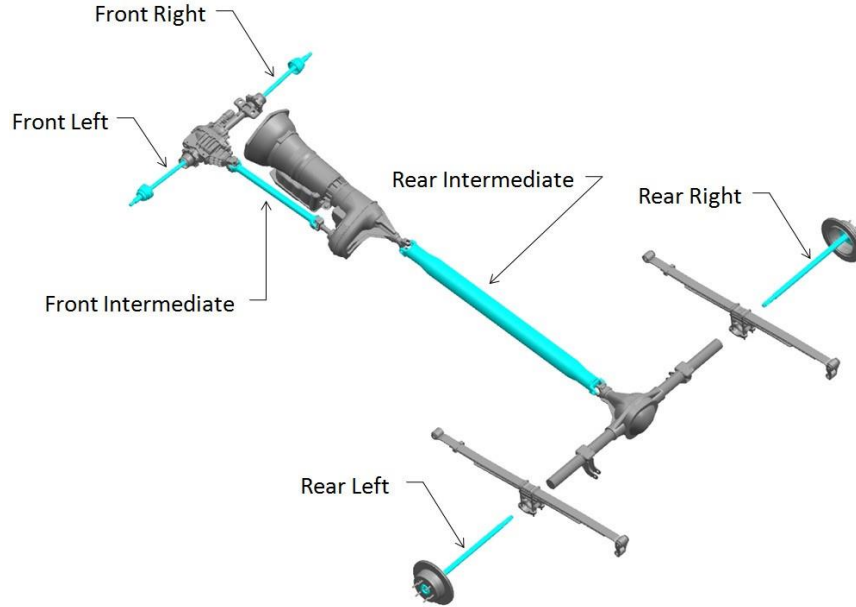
Baseline Chevrolet Silverado Drive Shafts
